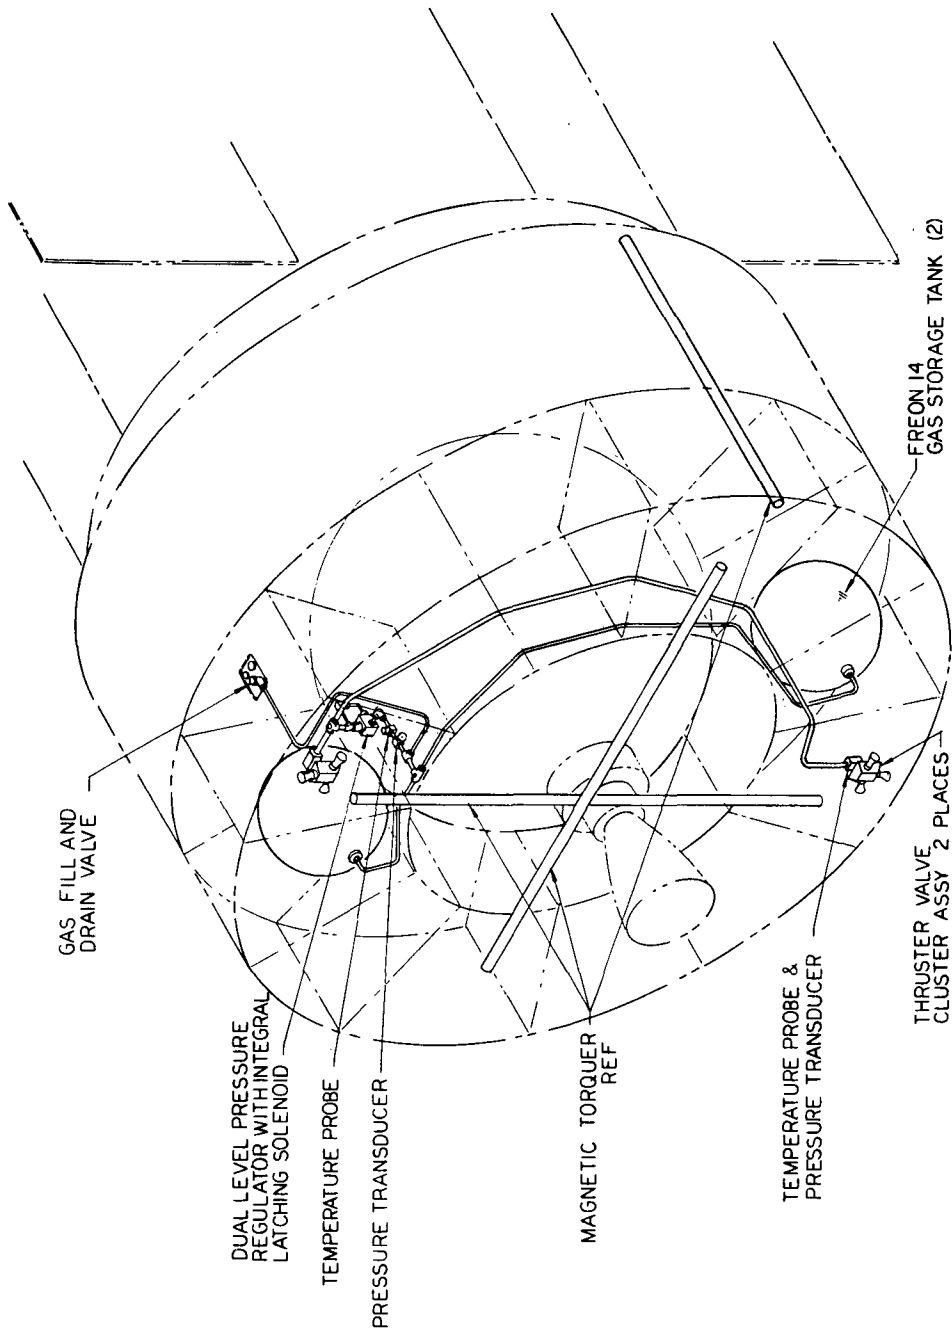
Cold gas RCS/magnetic torquer isometric layout.
